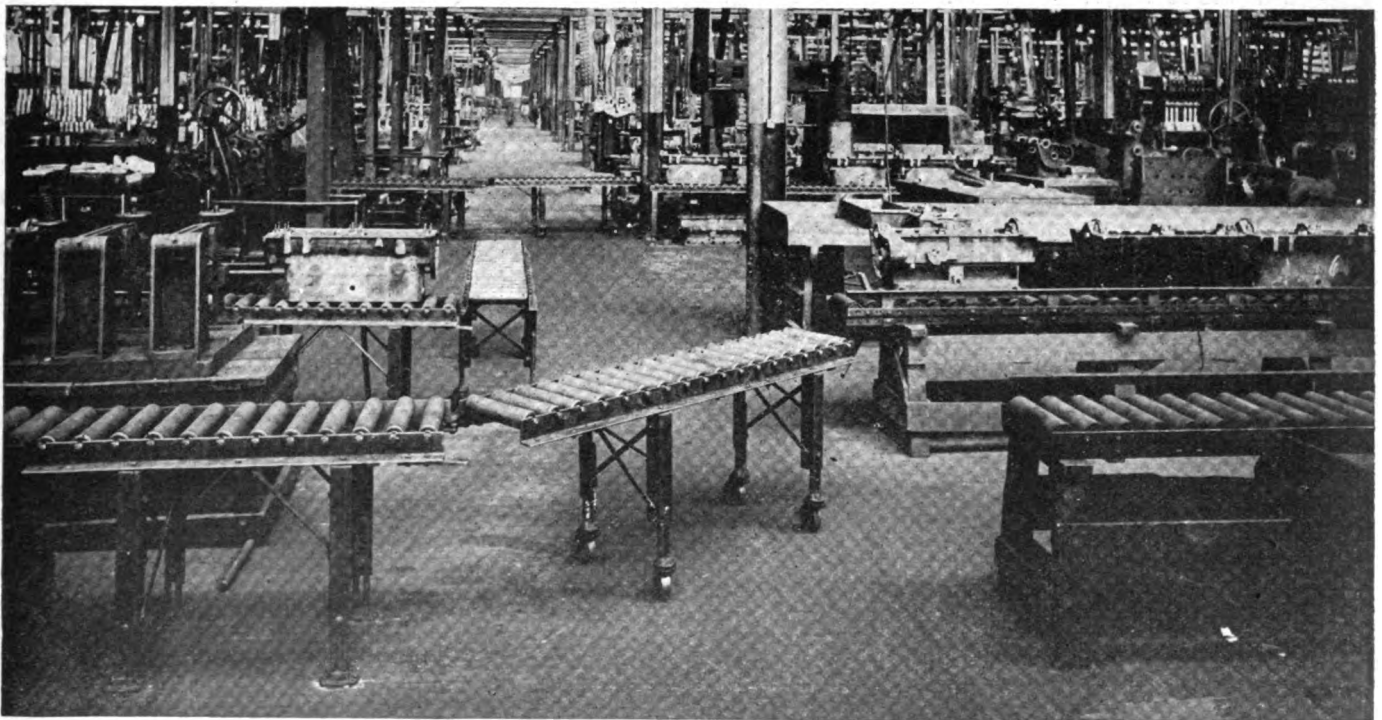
General view of part of Continental machine shop, showing method of installing ball-bearing carriers where they cross the traffic aisles
